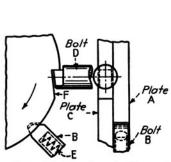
Plates A and C are fastened together, the former accommodating the bolt B, whereas plate C is positioned by bolt D. Rotated in direction of arrow, bolt B slides into slot in plate A, one side being milled to 20 deg. When indexing begins and bolt D is pulled away, 45-deg. slot in plate A pushes out the bolt B, both bolts then riding on periphery of respective plates, and bolt D sliding down the easy incline F to a predetermined depth.
